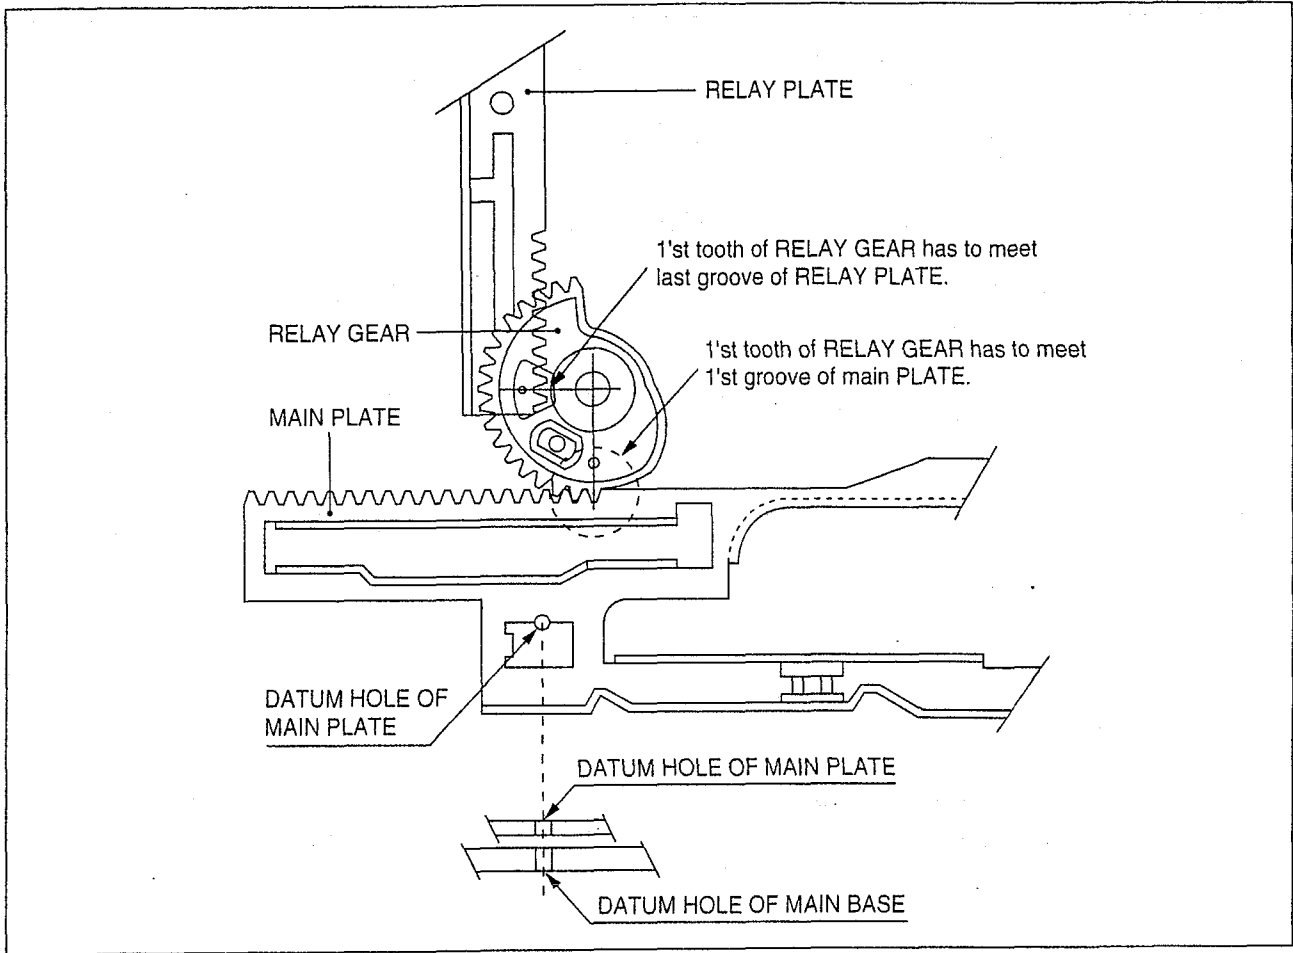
DATUM POSITION OF MAIN PLATE & RELAY GEAR
